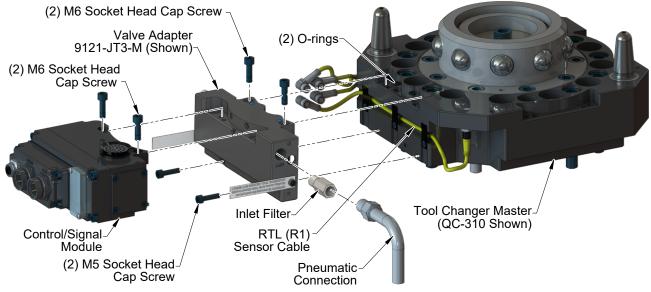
Valve Adapter Installation (QC-310 Shown)
